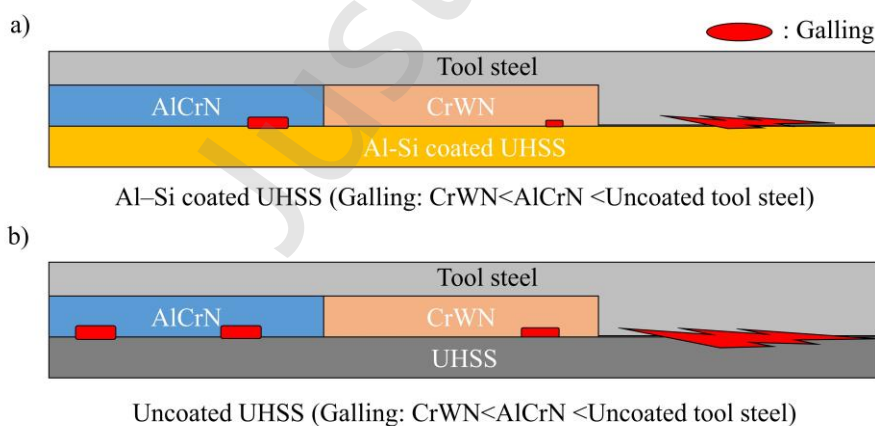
Schematic diagram of tool and workpiece adhesion: a) Al-Si coated UHSS, and b) Uncoated UHSS [66–68].
